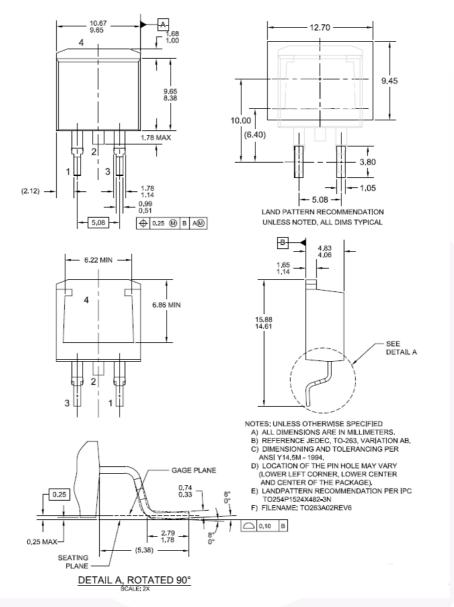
TO-263 2L (D2-PAK) - 2LD, TO263, SURFACE MOUNT
